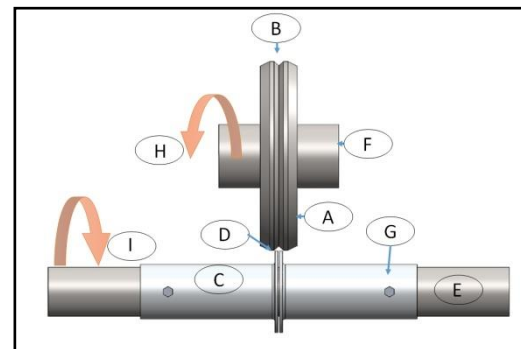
Schematic diagram of OFCW process, A is the OFCW tool, B is the tool groove, C is the base metal tube, D is the additional flanges, E is the mandrel of workpieces, F is the shaft for driven the tool, G is a pin to fix the tube on the mandrel, H is the direction of rotational motion of the tool, and I is the direction of rotational motion of the workpieces.
